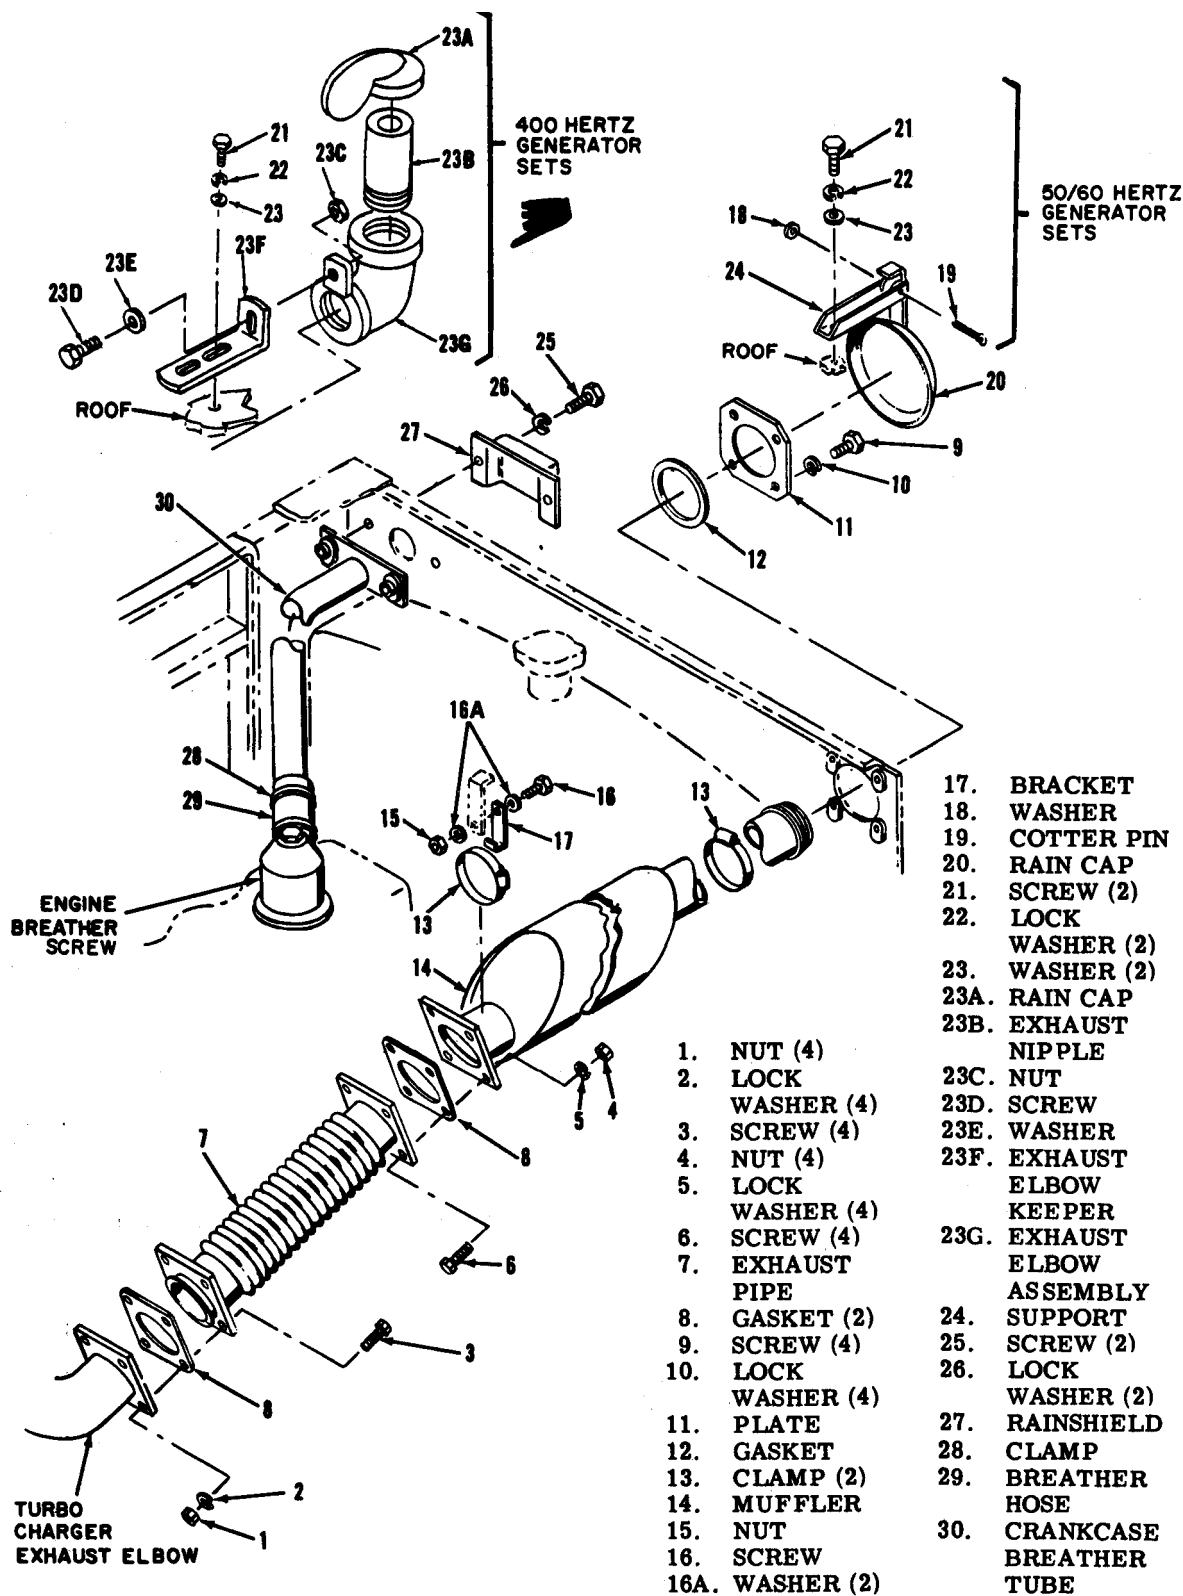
Muffler, exhaust pipe, and crankcase breather tube and hose, removal and installation
